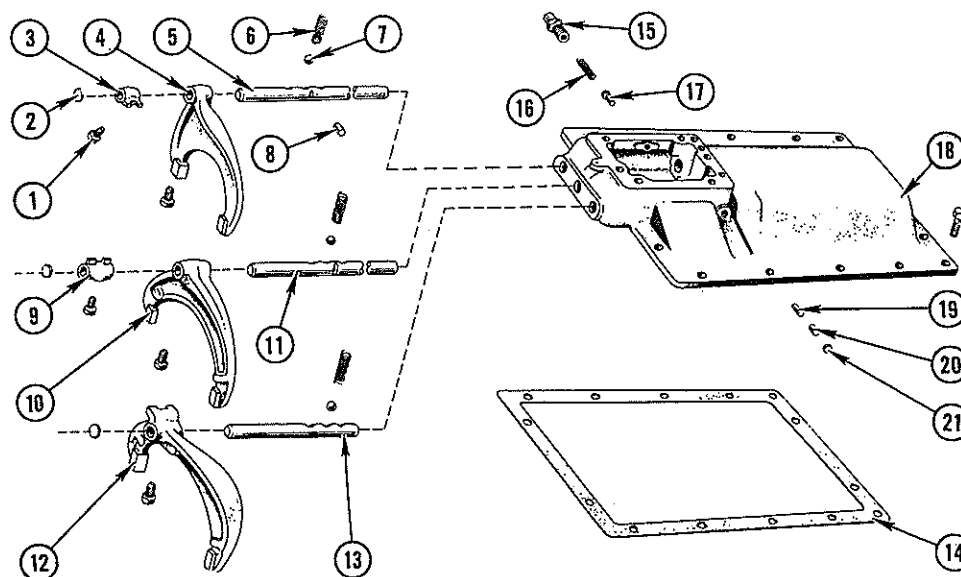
SHIFT BAR HOUSING, EXPLODED VIEW
